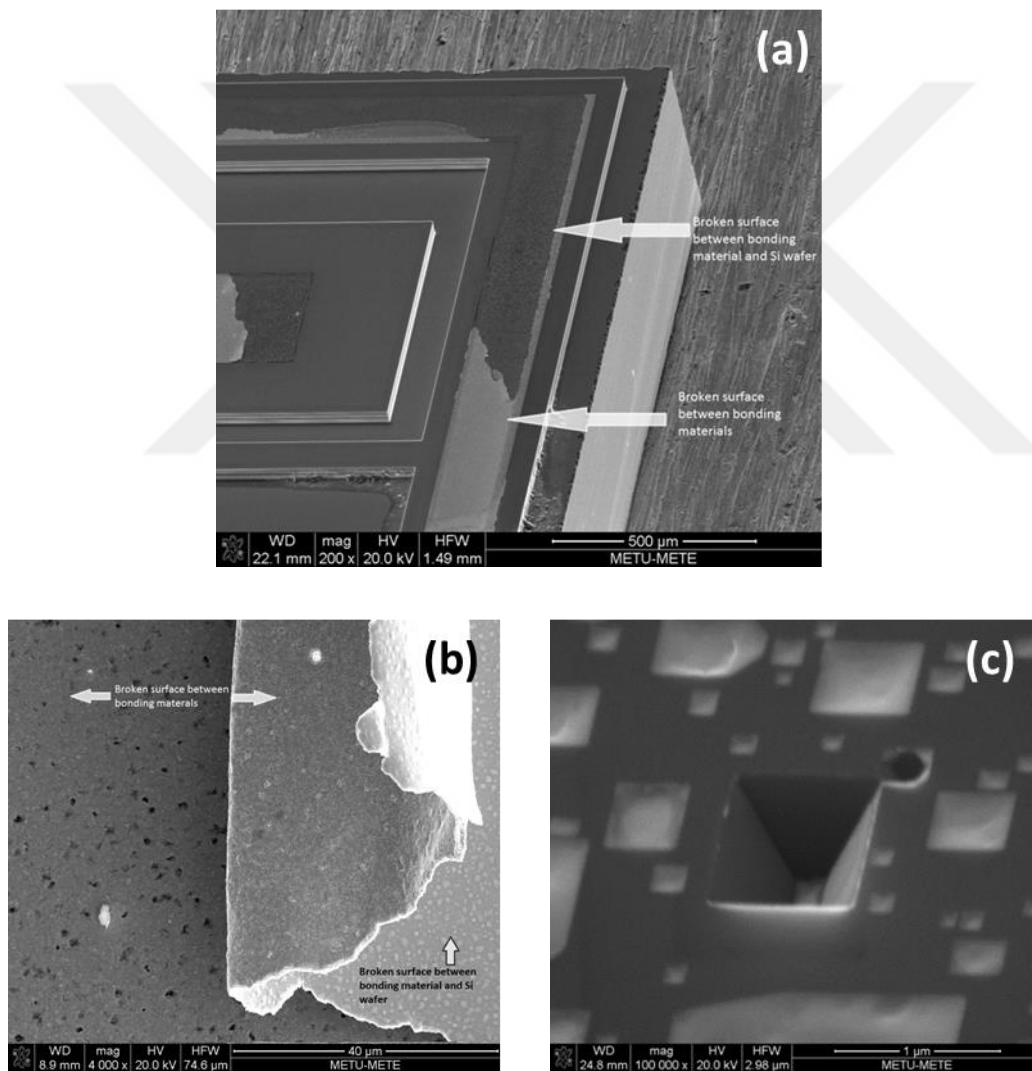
SEM image of fracture surface of the packaged chip after shear test applied: (a) Si side, (b) glass side and (c) magnified view of Si side [53].
